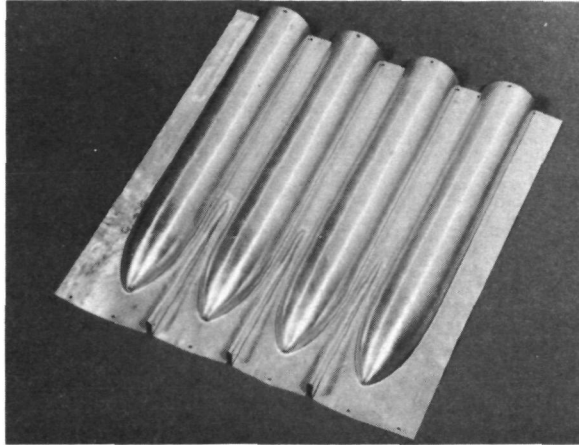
ALTERNATE CIRCULAR TUBE END CLOSURE
